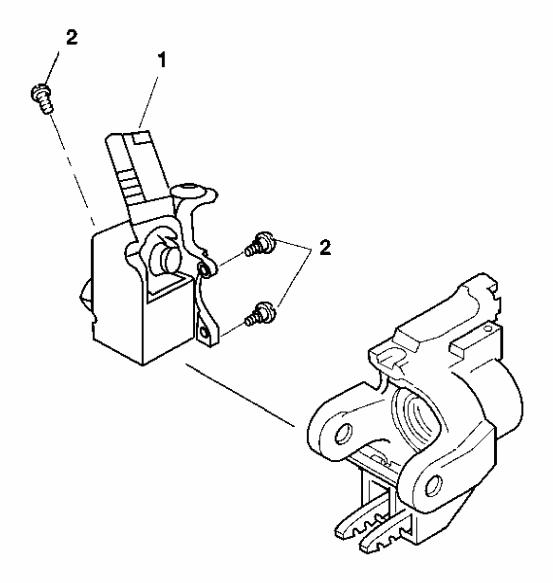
View Of Ignition Lock Cylinder Case Assembly & Screws Courtesy of GENERAL MOTORS CORP.
